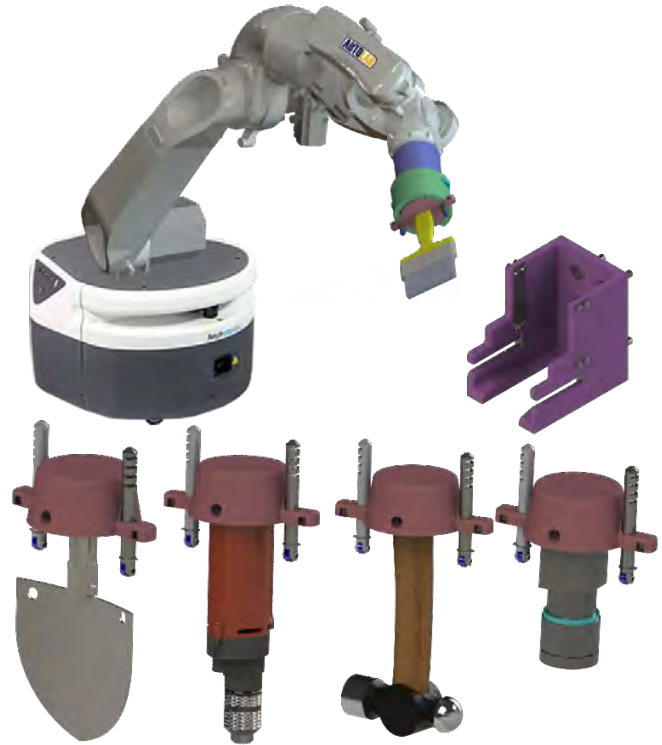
Top: mobile manipulator robot equipped with the tool changer system, and tool housing. Bottom: example tools.
